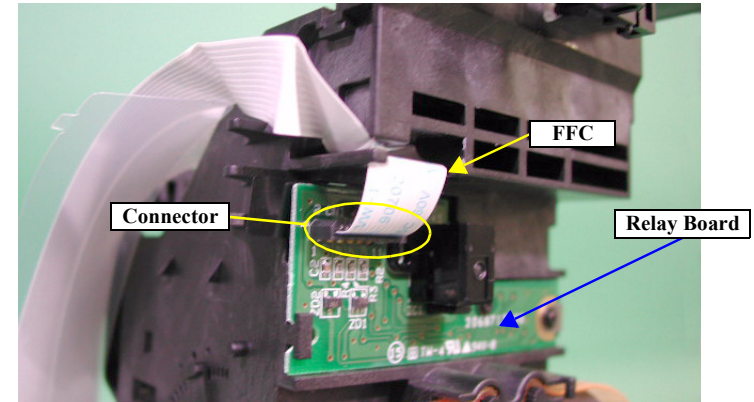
CR Guide Shaft/Carriage Unit Removal 3
